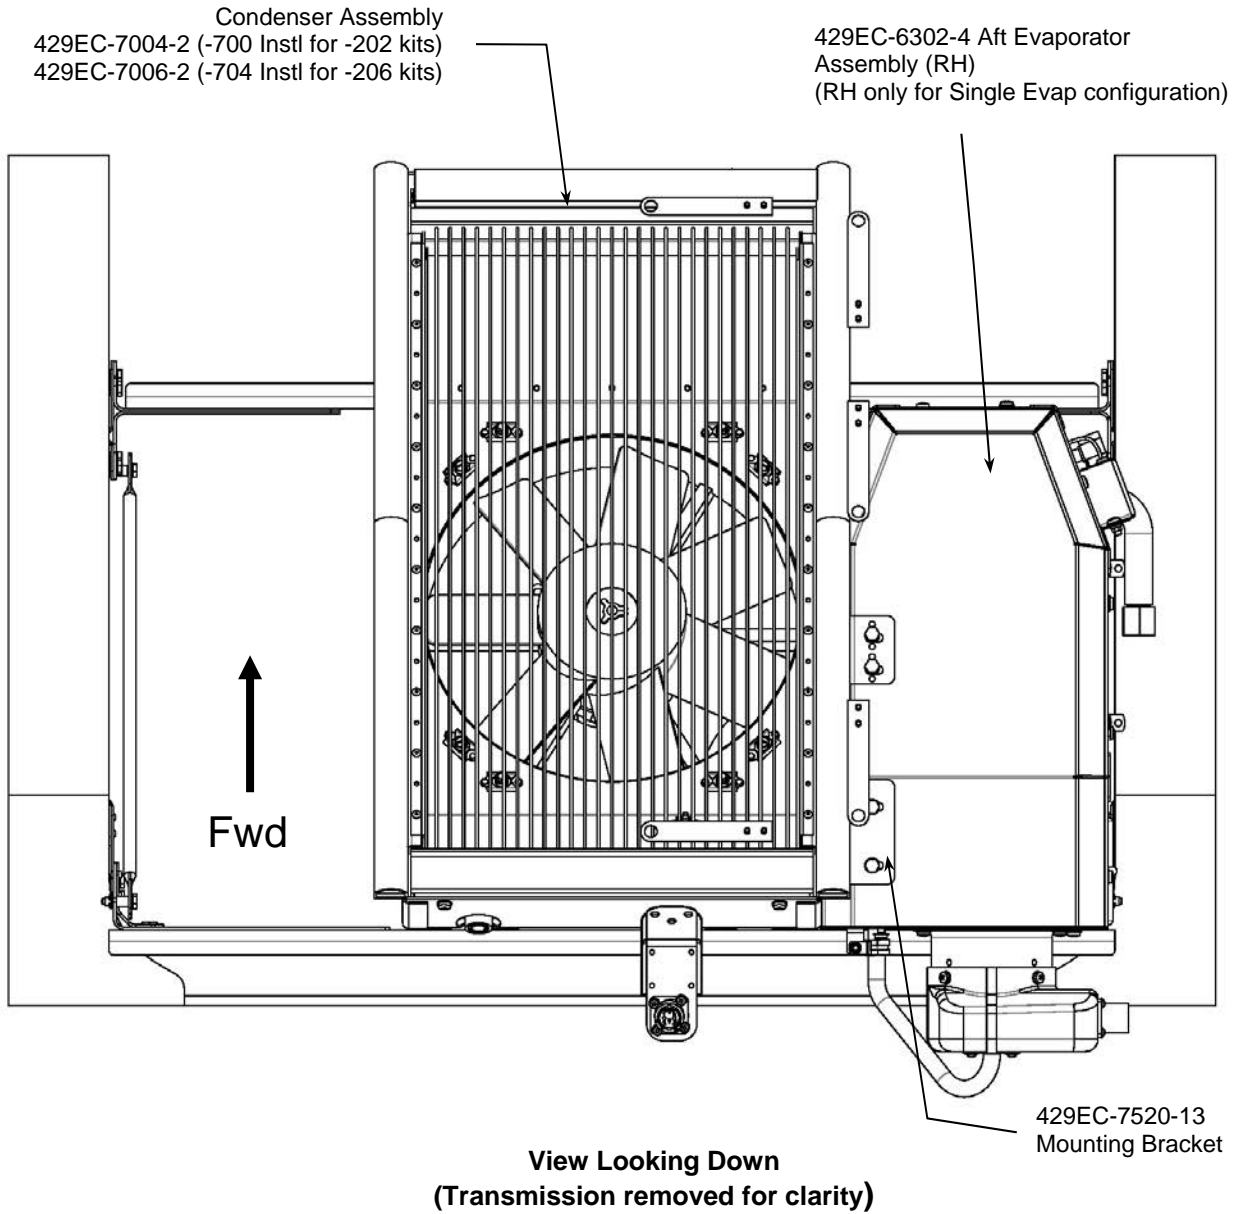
429EC-624 Single Aft Evaporator and 429EC-700 and 429EC-704 Condenser Installation (-202, -206 kits)
